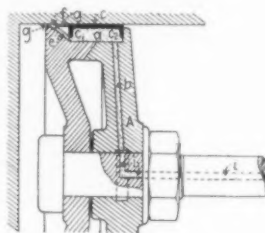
INTERNAL COMBUSTION ENGINE PISTON WITH FUEL DELIVERY THROUGH THE PISTON RINGS
